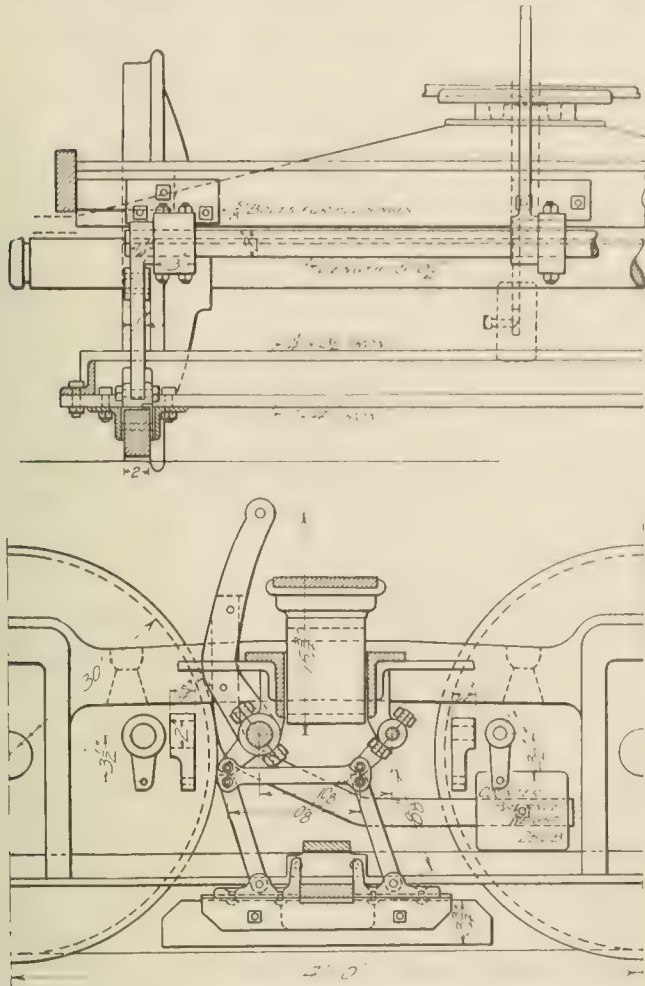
and 5.—TRACK BRAKE APPLIED TO BRILL G. DOUBLE TRUCK one on each end, and one near the counter-weight arm. The short shaft is held by 2 boxes, one on each side of lever.
